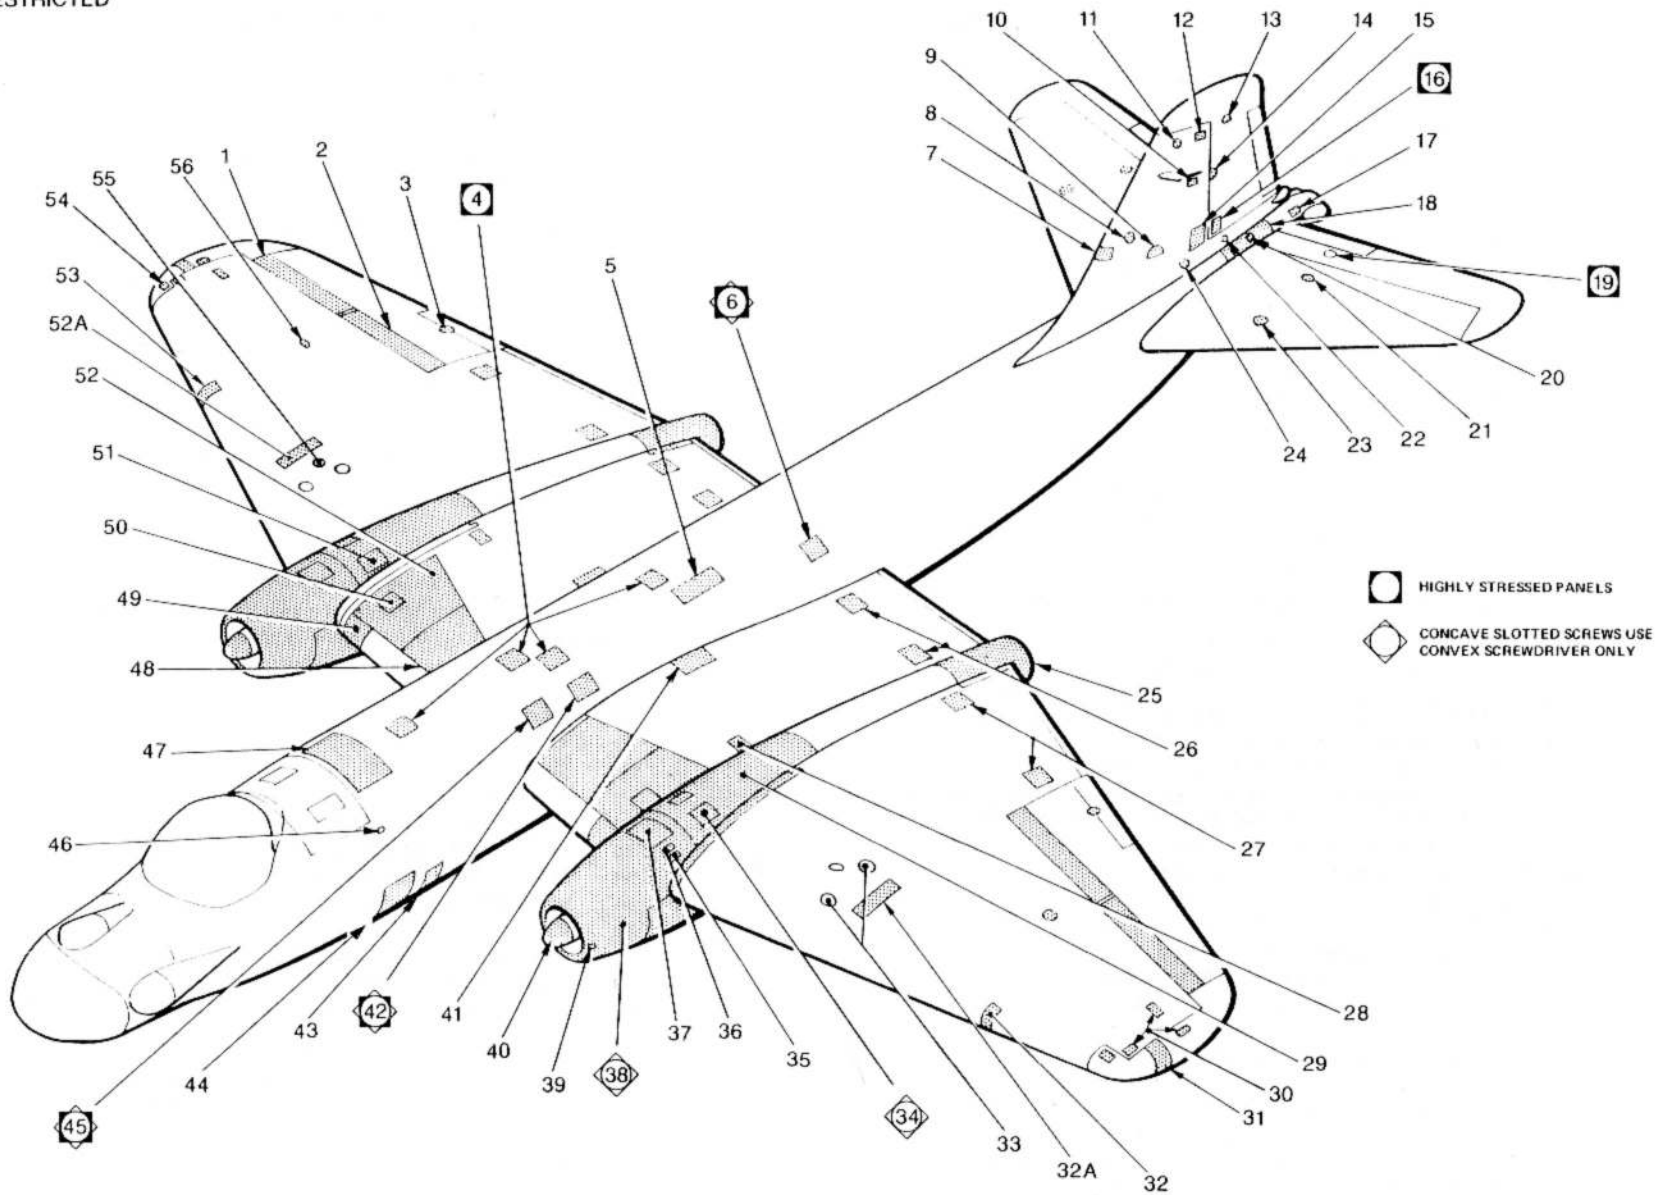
ACCESS PANELS, UPPER SURFACE AND PORT SIDE
